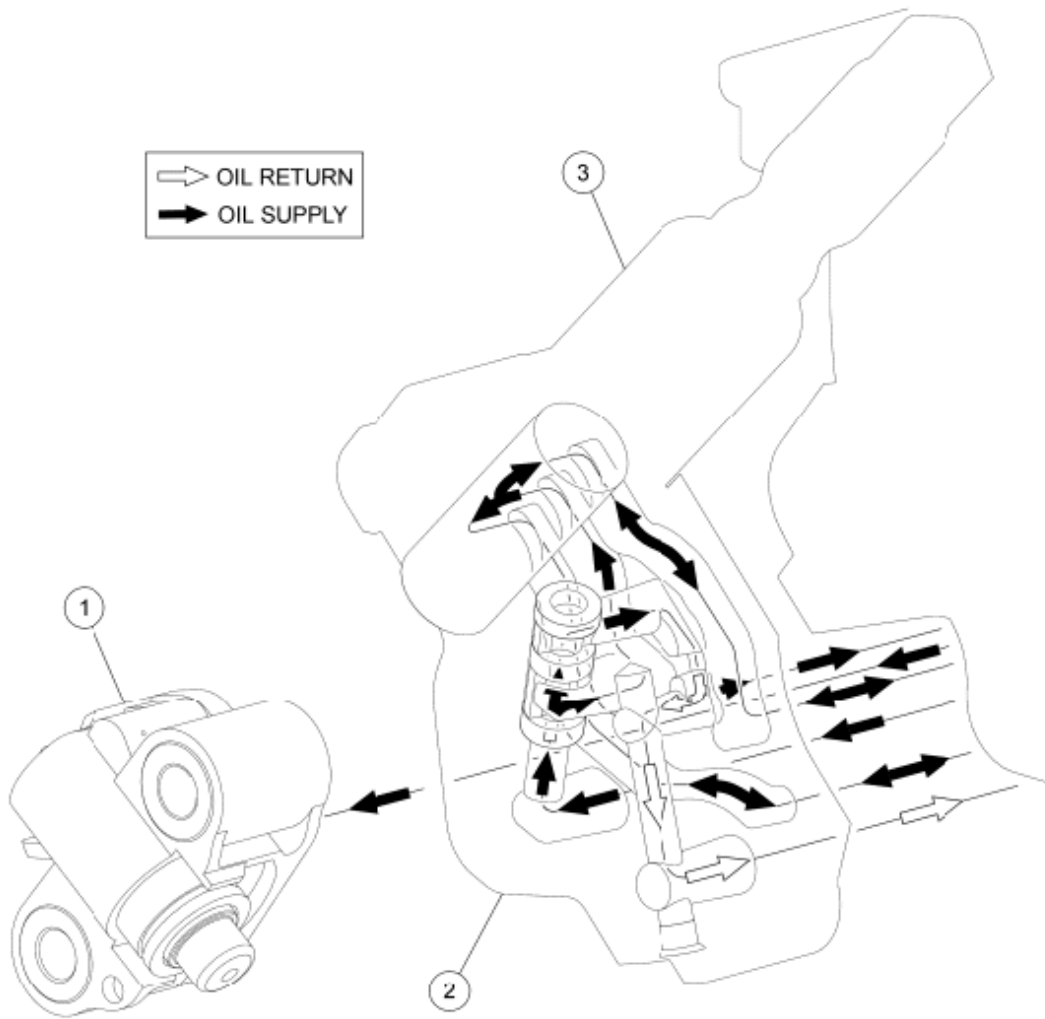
Identifying Camshaft Phaser, Sprocket, Camshaft Phaser, Sprocket Bolt And Camshaft (Oil Return And Oil Supply)
